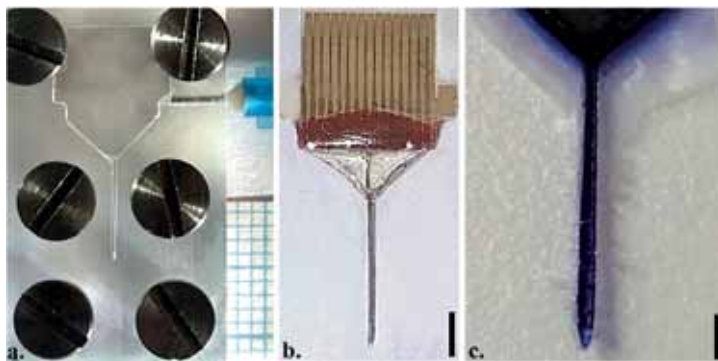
Images visualizing the mould and probe after being embedded using the mould. The manufactured mould (a) enabled gelatine embedding of the cluster electrode wires into a single shank (b) with a cone shaped tip (c) to facilitate the penetration during the implantation procedure. The kollicoated gelatine embedded electrode bundle had a diameter of ~ 250 μm . Scale bar: b = 2 mm, c = 1.25 mm. Picture (b) reproduced from Etemadi L., Mohammed M., Thorbergsson P.T., Ekstrand J., Friberg A., Granmo M., Pettersson L.M., Schouenborg J. Plos One 2016. 11(5): e0155109.; open access publication.
